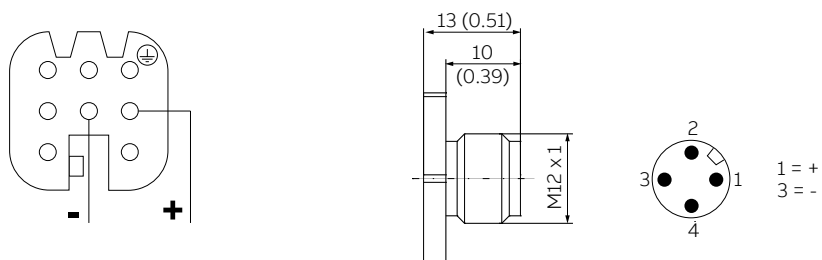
Pin layout of Harting HAN 8D (socket view) and M12 x 1 connector
